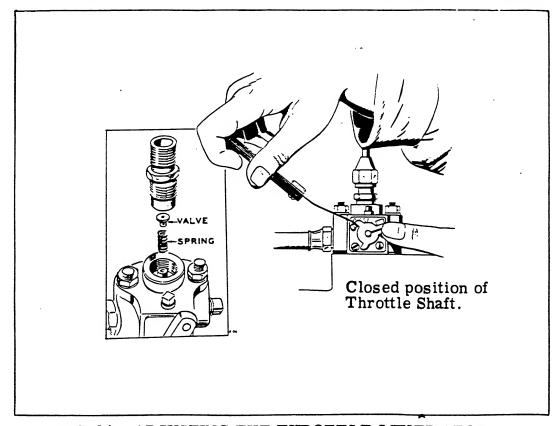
ADJUSTING THE THROTTLE LEVER STOP
